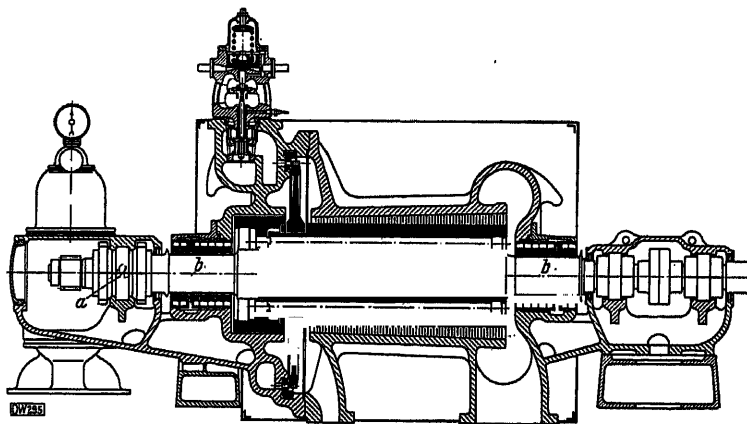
B.B.C.*, 380 kw., 5000/1500 R.P.M., geared back-pressure turbine
